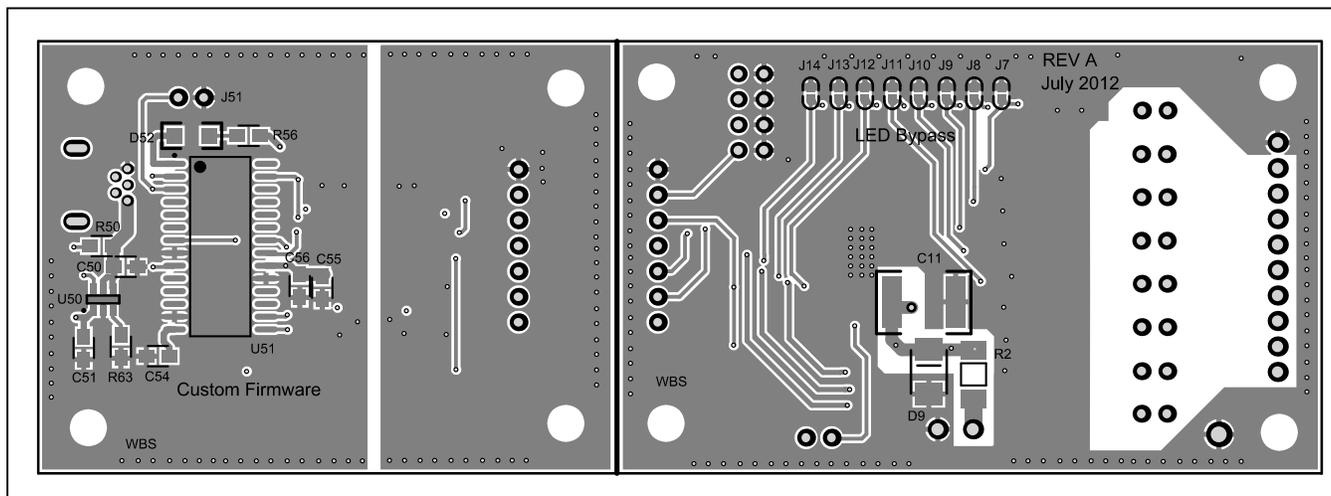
MAX31912/MAX31913 EV Kit PCB Layout—Bottom
